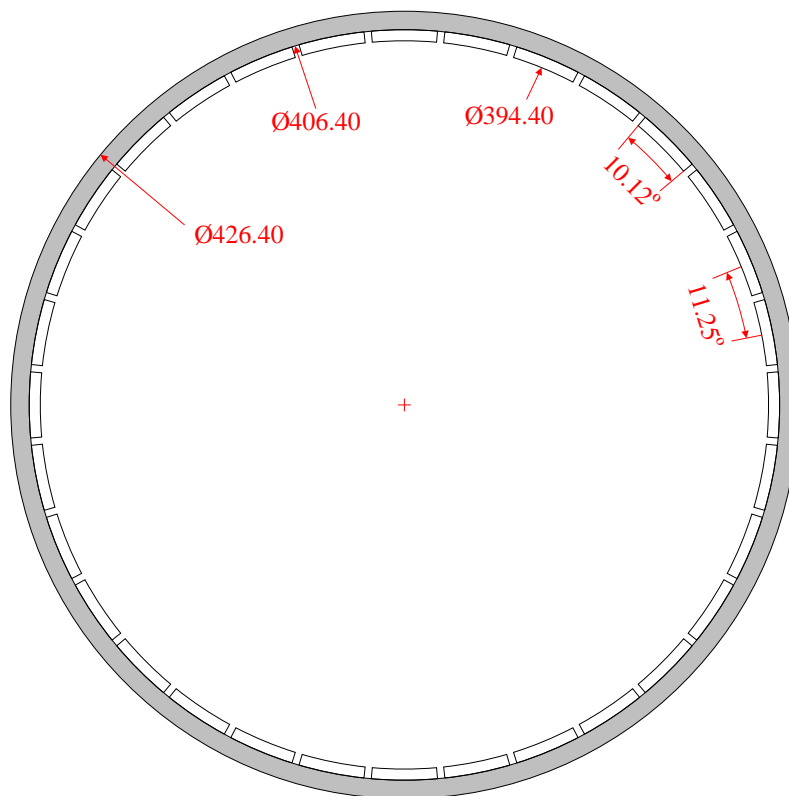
Rotor of 42S/32P Prototyped Machine.
